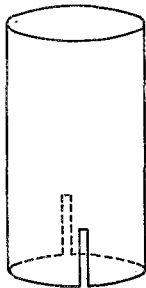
Method of notching tubing for use in drilling holes through panes of glass.
